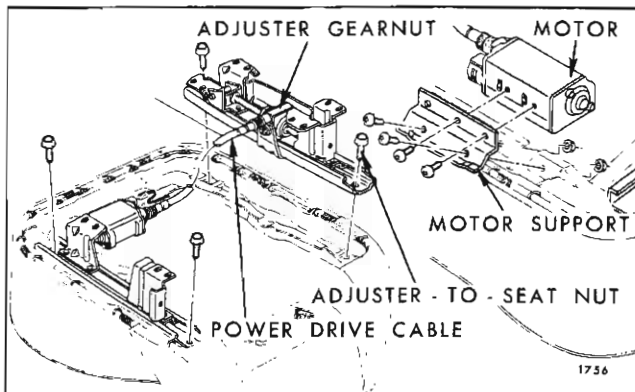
H22—Bucket Seat Adjuster and Motor Two-Way Power
